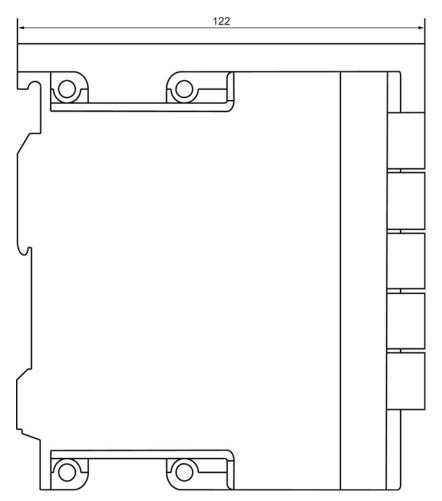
Dimension drawing, side view of SCALANCE X005 or SCALANCE X005TS
